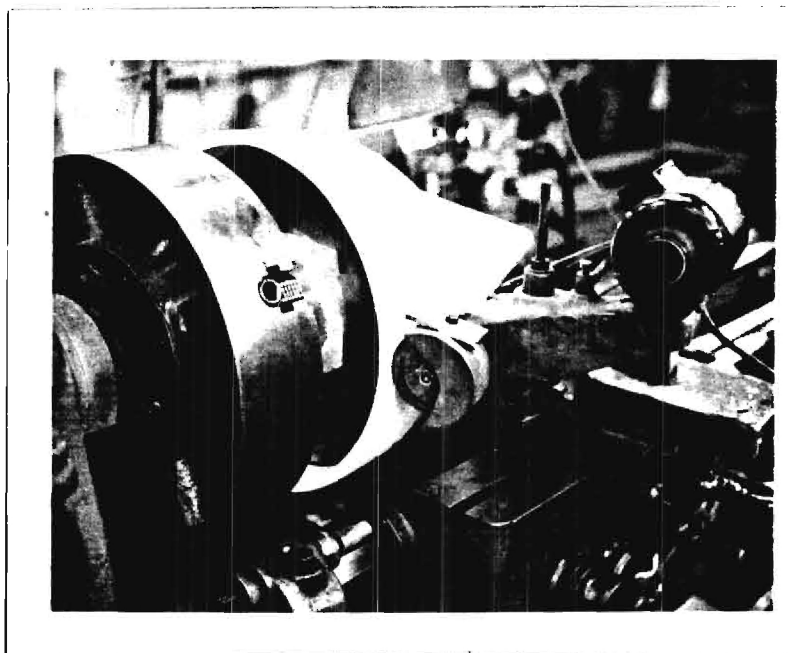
Radome Setup on Vacuum Mandrel for External Machining
